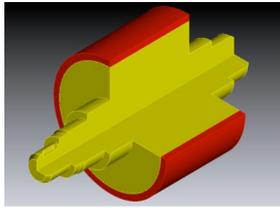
Variant F1₈ – Cylinder + shaft, one-piece + cylinder wear
